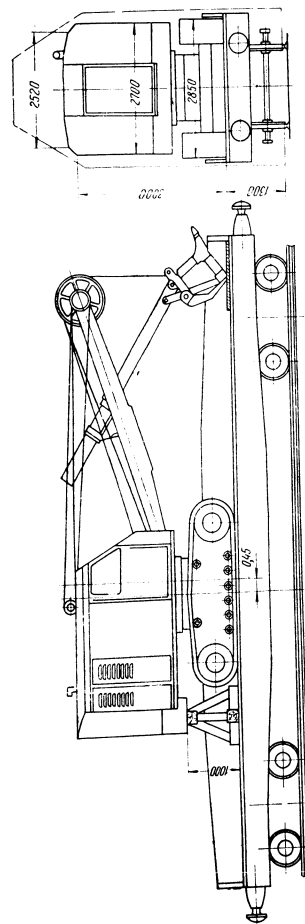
Arrangement of Excavator on Four-Axle Railway Flat-Car
